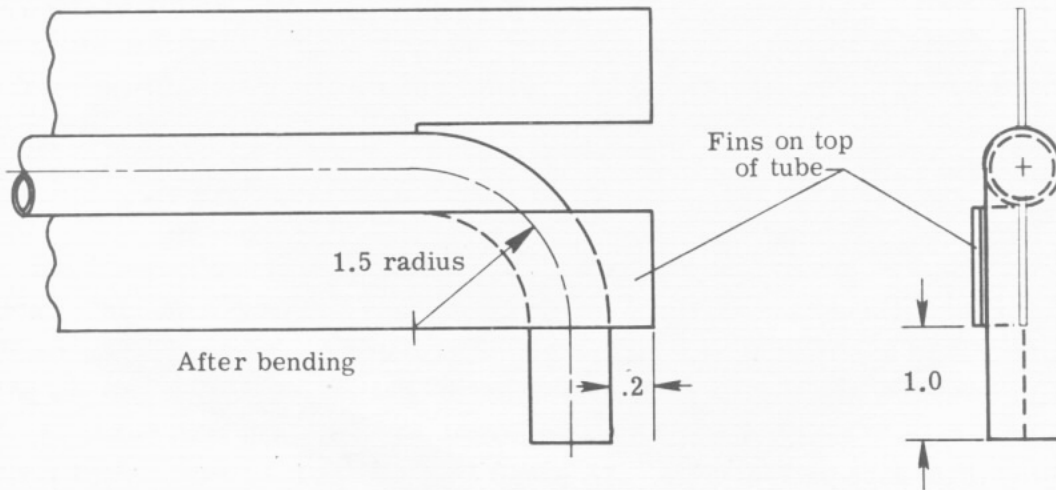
Typical end connection of panel. Linear dimensions are in inches.
